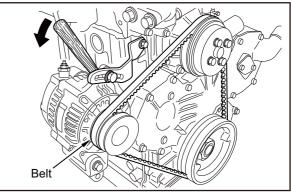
Belt and belt tension - Inspect and Adjust
